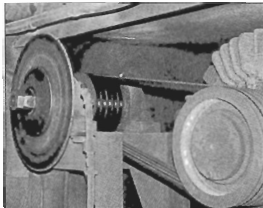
Friction saw and pulley assembly used in Helcor machine
